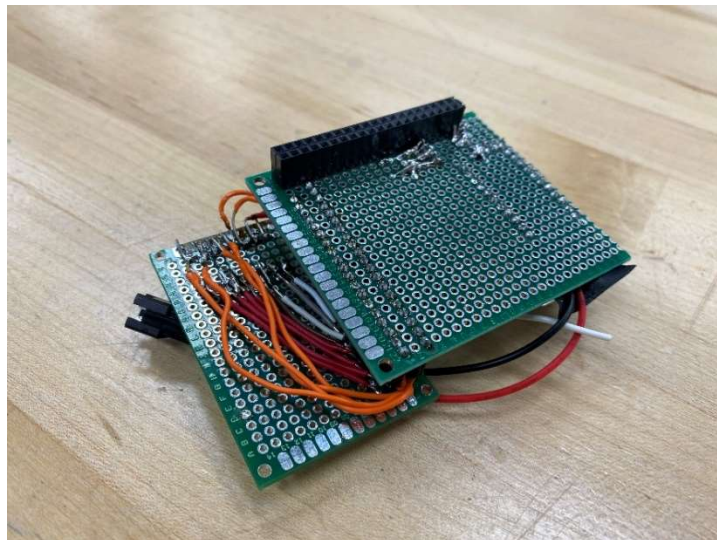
Underside of Perforated Boards During Assembly with Jumper Wires
